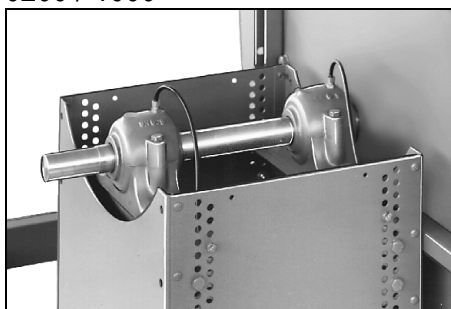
Self aligning double row bearing in a Plummer block housing
